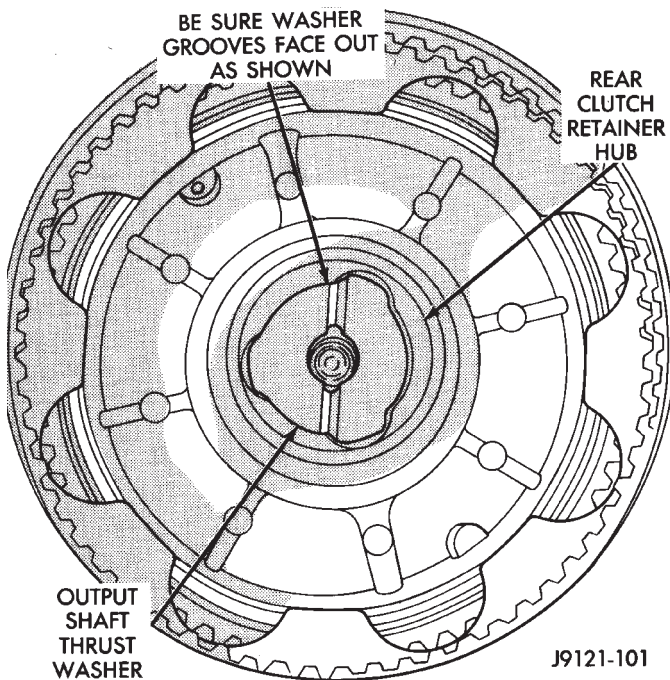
Installing Intermediate Shaft Thrust Washer (46RH)
